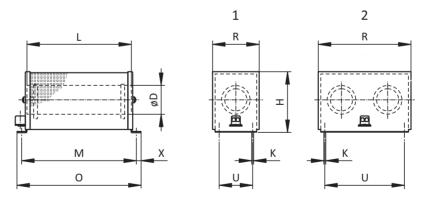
FZMU (1), FZZMU (2) dimensional drawing
